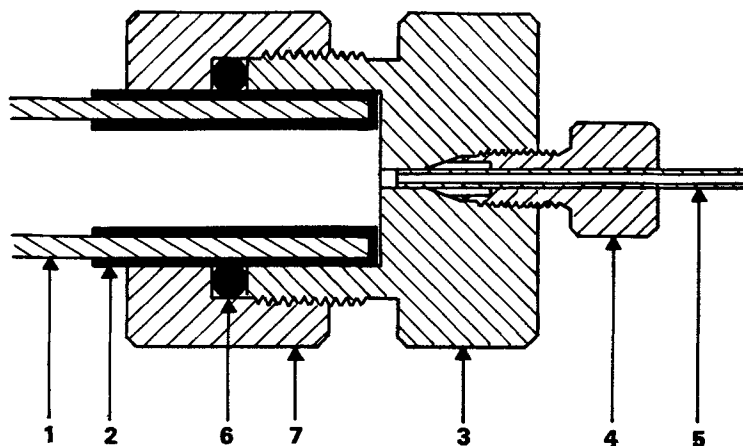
Schematic drawing of the membrane end-fitting: (1) membrane tube, (2) polyimide coating, (3) body, (4) compression screw, (5) porometer tube, (6) O-ring, (7) nut.
